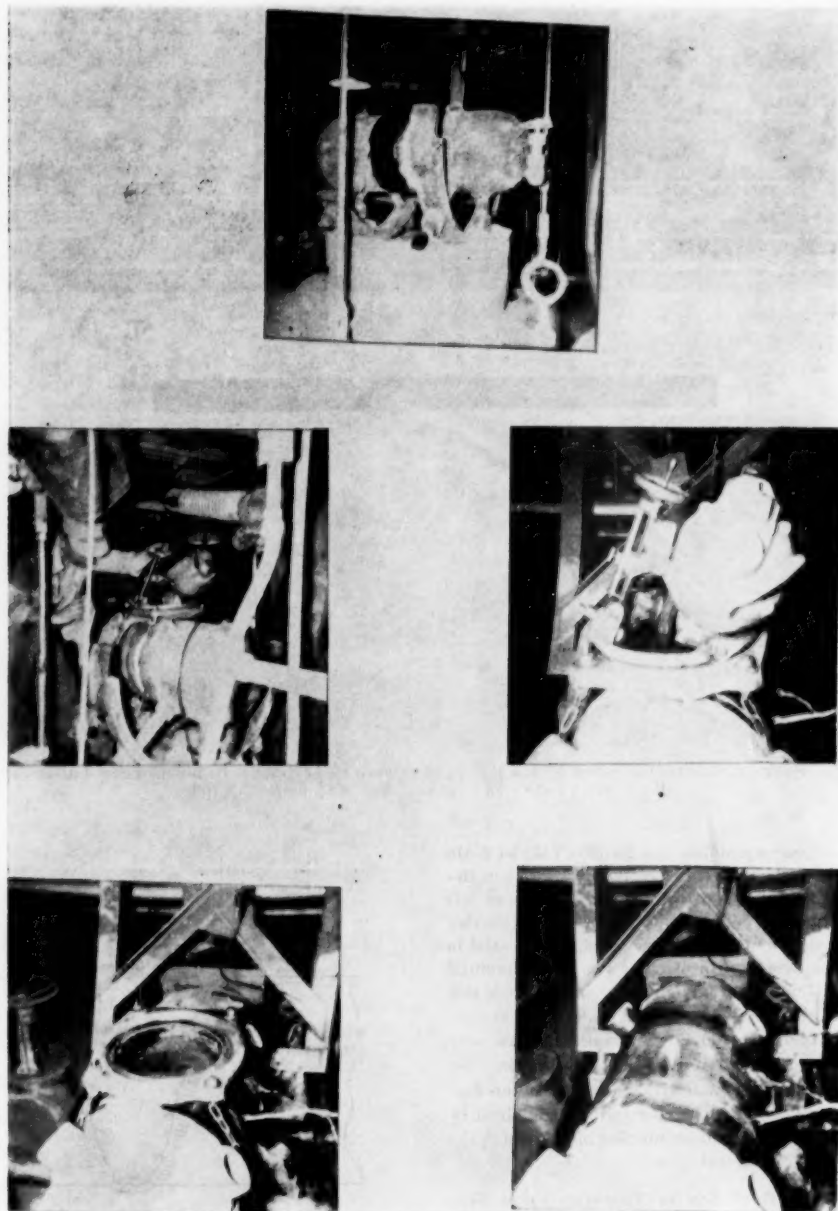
PHILIP SPORN UNIT NO. 1 WELD TEST VESSEL AND WELD-PROBE MACHINE REMOVING THIRD BOAT SAMPLE
